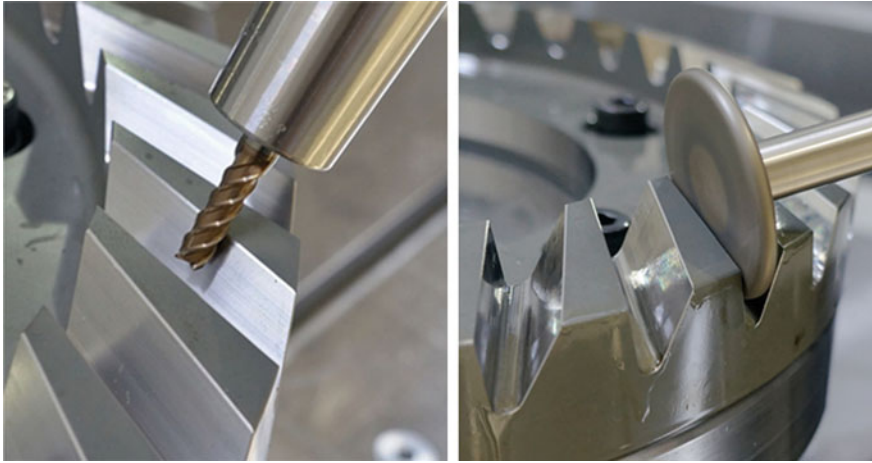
Rough-cutting and finish-grinding of IPB wheel teeth
